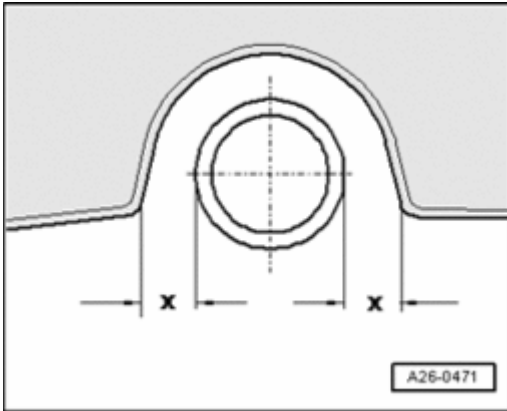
Checking Distance Of End Pipes At Left/Right To Bumper
